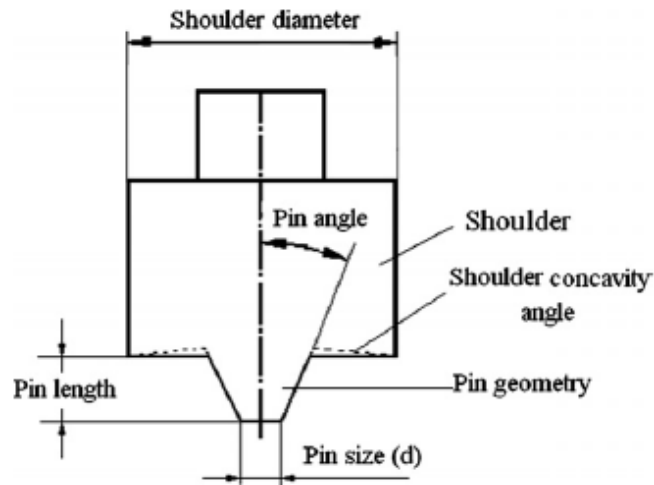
Friction stir spot welding tool design showing geometric parameters (Bilici et al., 2012)
